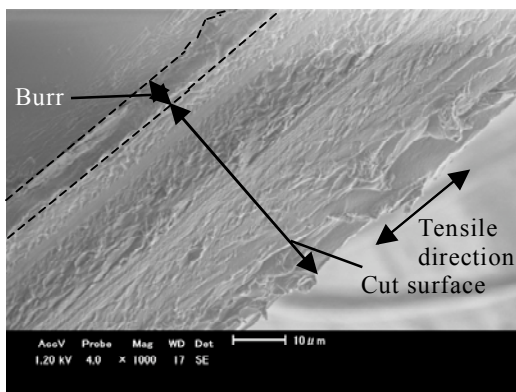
Photograph of the fractured test specimen (FHG YAG laser)
